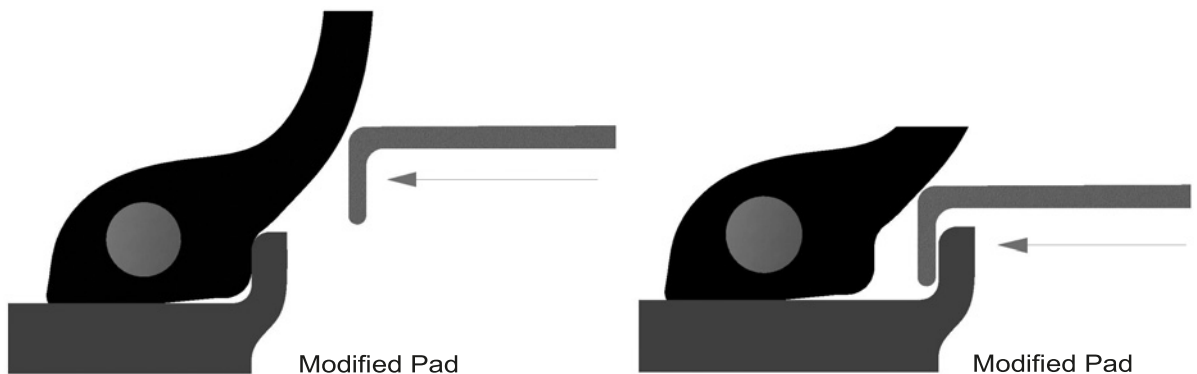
Modified Press Pad for Pincher-Type Bead Breakers
